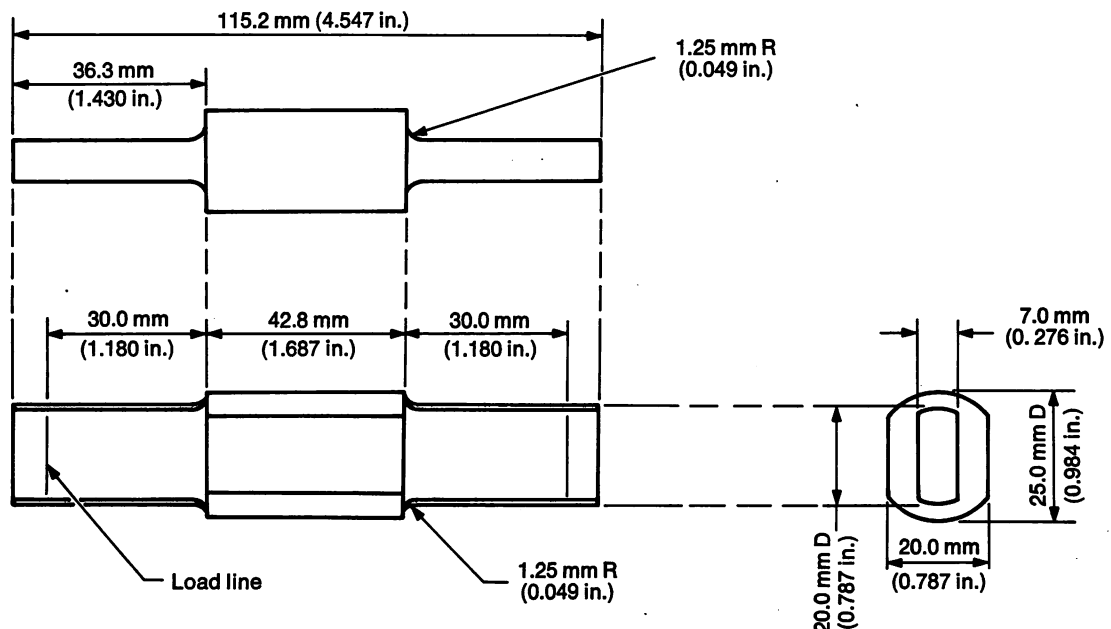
Specimen geometry used for determining the impact fracture stress of carburized steels.
